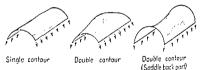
Typical shapes to which sheets may be readily stretch-formed.¹³
